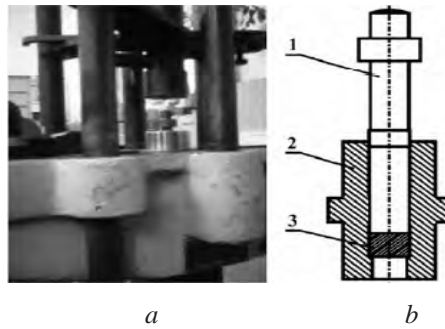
Working part of the YBM-50 machine with installed press device (a), press device (b)
